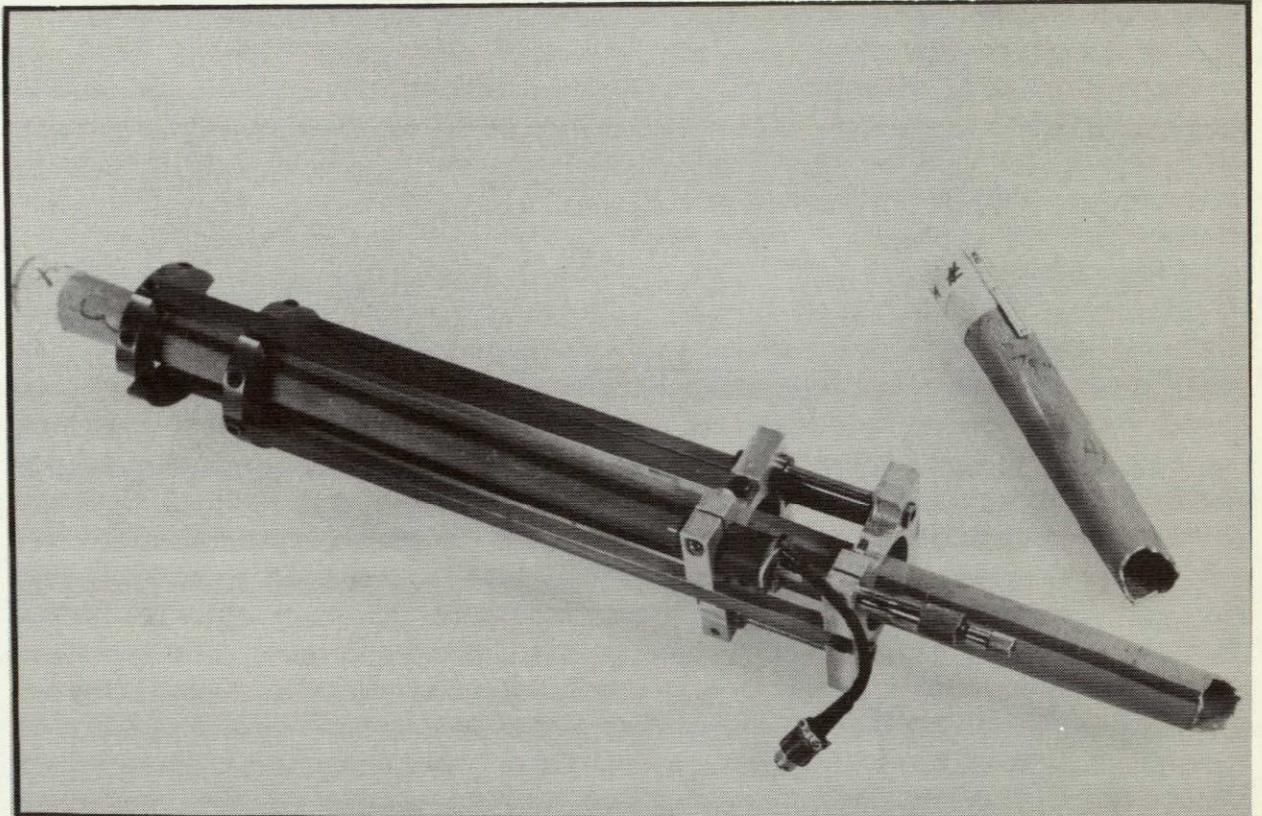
Tubular Extensometer and Tested Task I Tensile Specimen Showing Fracture Appearance.
